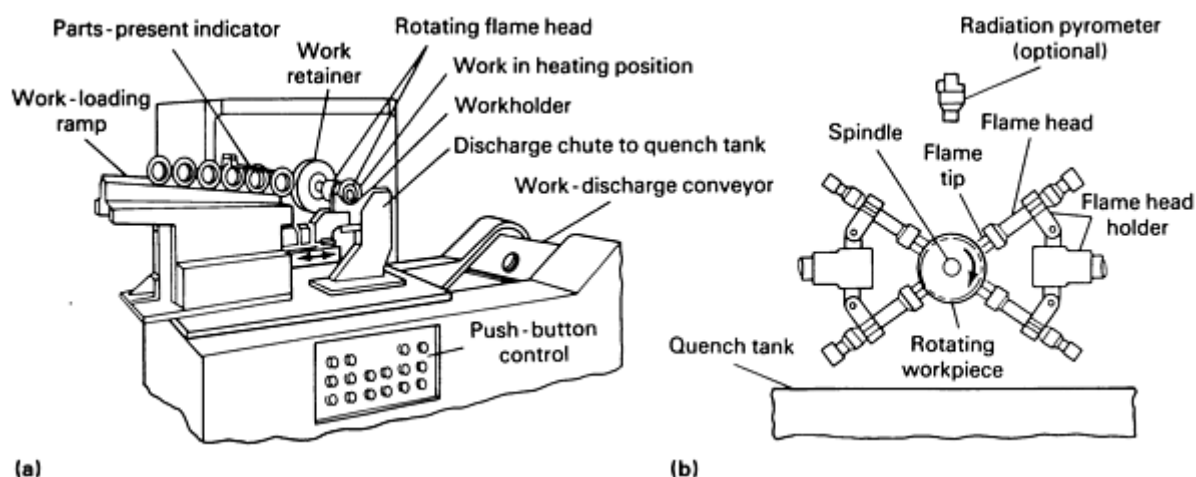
Typical flame-hardening installations using oxy-fuel gas mixtures. (a) Installation for high production of similar parts: hardening the 54 mm ($2\frac{1}{8}$ in.) bores of hubs to a depth of about 3.2 mm ($\frac{1}{8}$ in.). Machine has a
